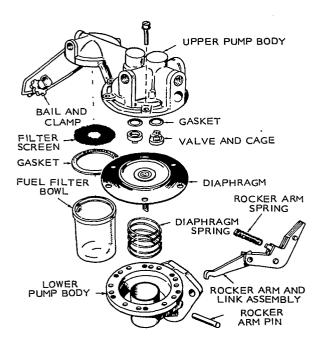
EXPLODED VIEW OF J-SERIES PUMP
